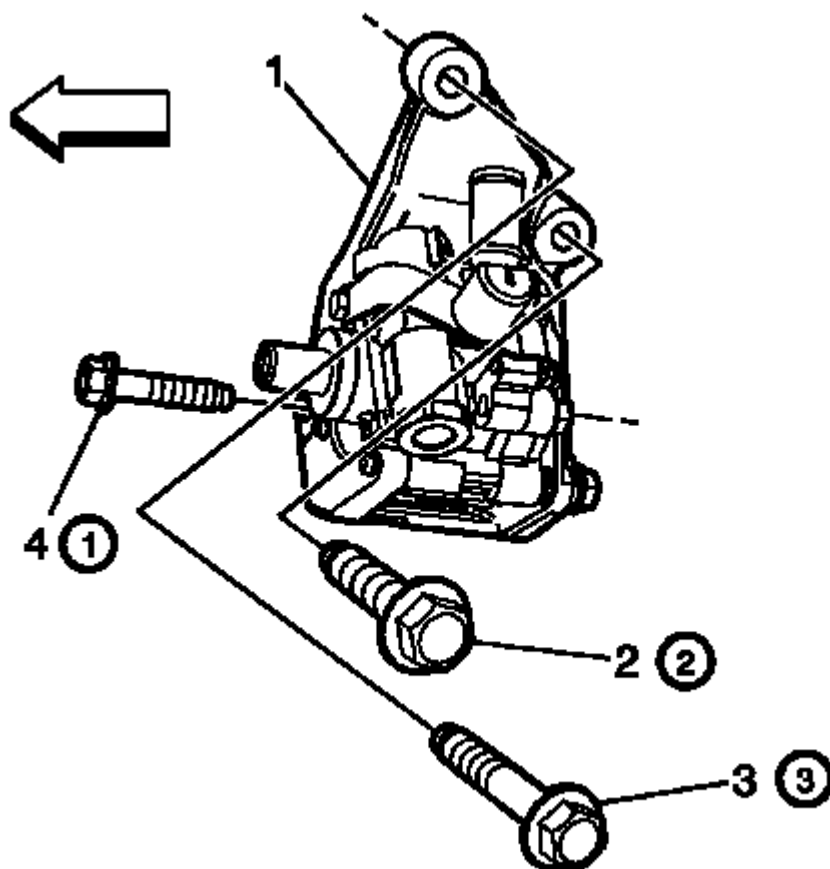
Power Steering Pump Bracket & Bolt Tightening Sequence
